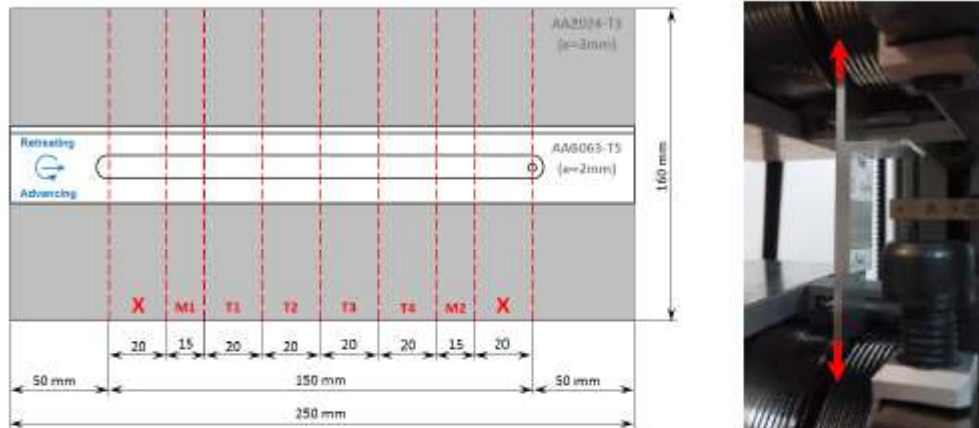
Sample obtainment and tensile test execution sketches, for welds made with F049 welding tool.
